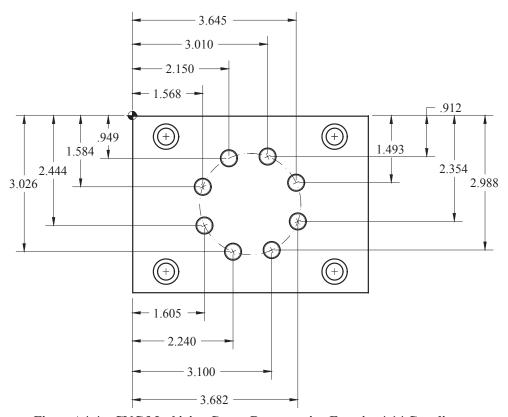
CNC Machining Center Programming Exercise 4-14 Coordinates
